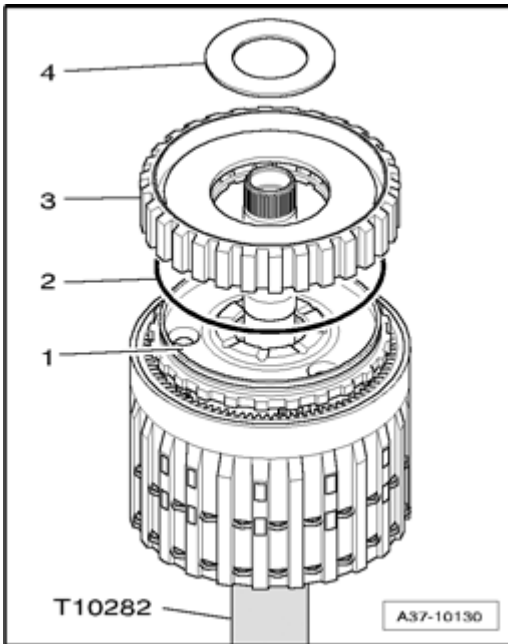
Planetary Carrier "I", O-Ring, Plate Carrier "E" And Thrust Washer
